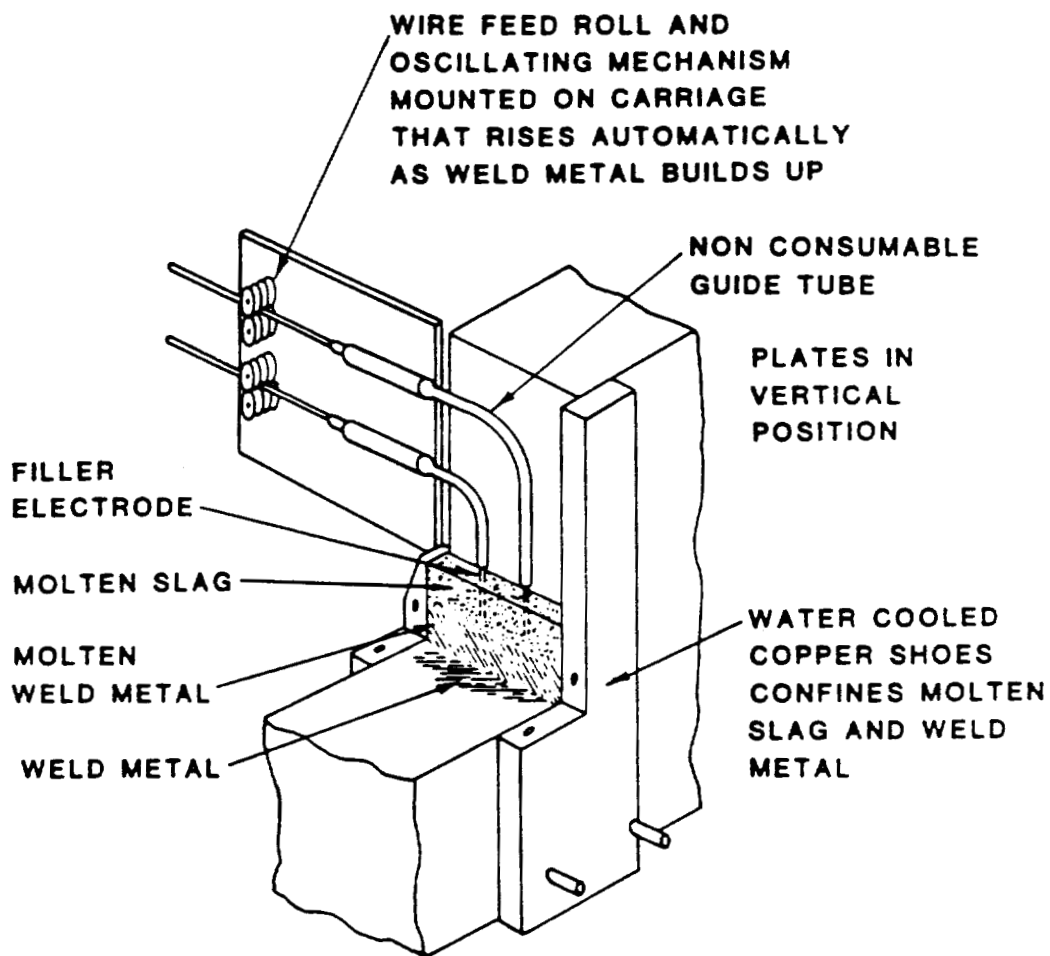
Schematic Representation of Conventional Electroslag Welding Process
